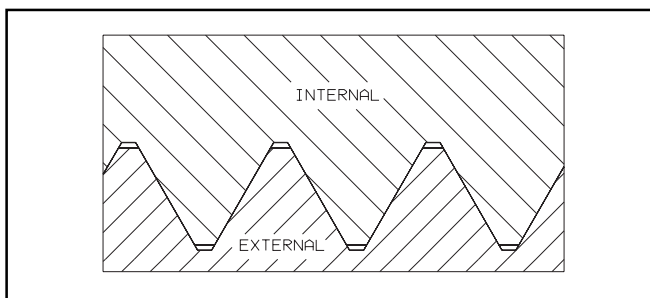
Dryseal American Standard Taper Pipe Thread — NPTF
